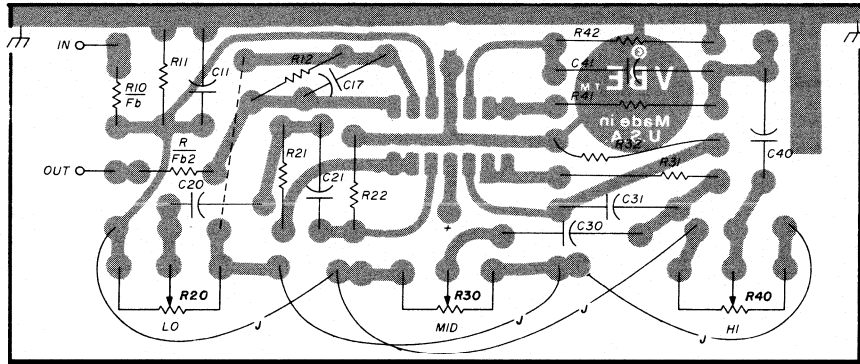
Component placement for the VBE. Control pot jumpers are mounted on the board but are shown off the board for clarity. Switch SW1 mounts onto the chassis as shown.
